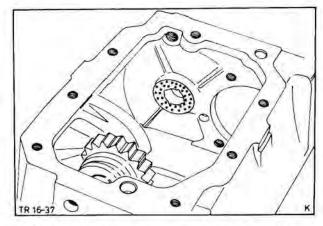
Stick thrust washers of countershaft gear train to gearbox casing
